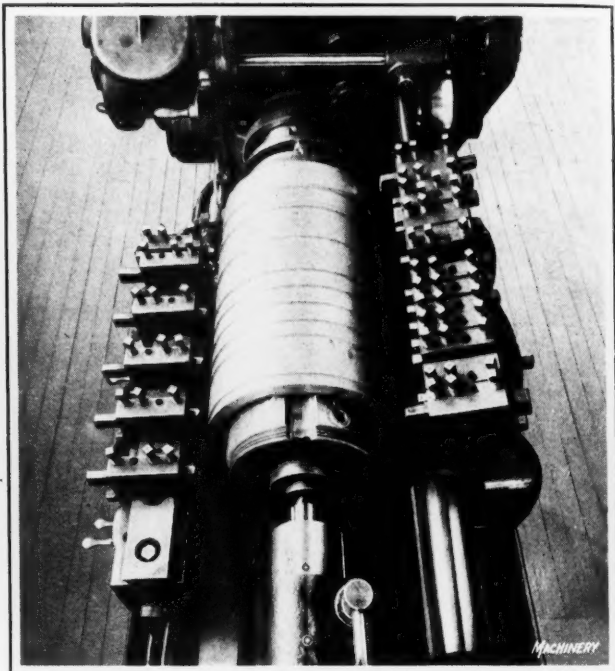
Close-up View of the Tooling employed on the Fay Automatic Lathe for machining a Cam Drum
